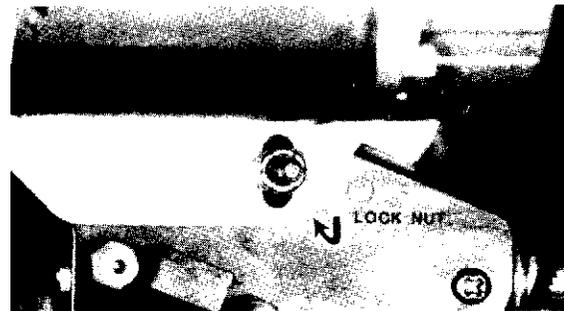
DRIVE BELT TENSION ADJUSTMENT
